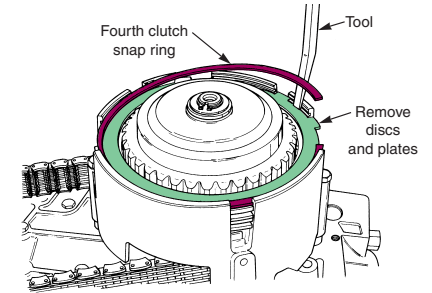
The clutch packs should be disassembled to check for burned friction discs and other problems. Most clutch packs are held together with a large snap ring, as shown here. (General Motors)
